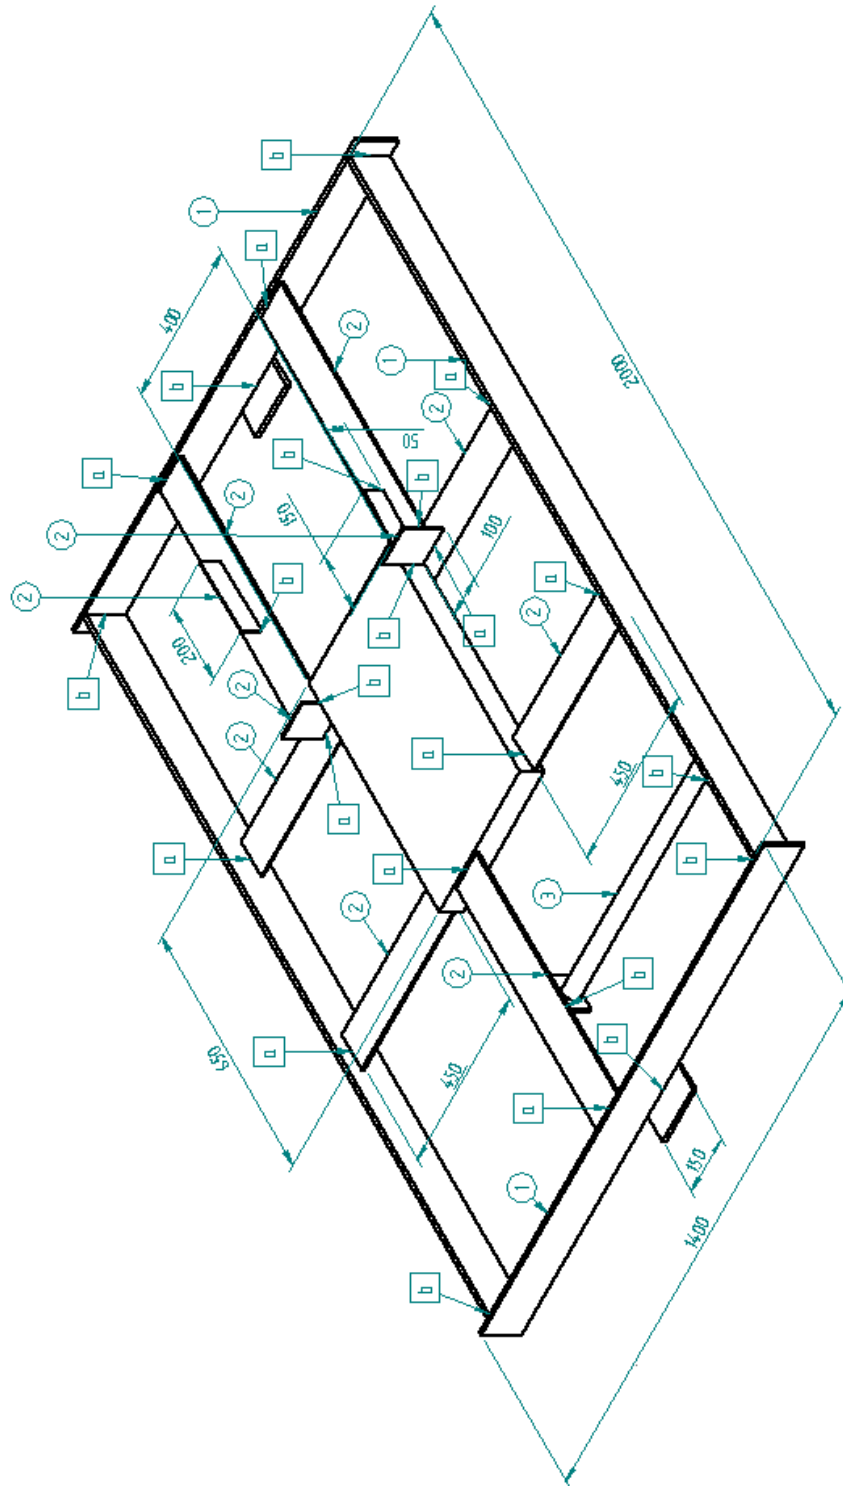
Final design of the H-frame including welding and plate properties.
